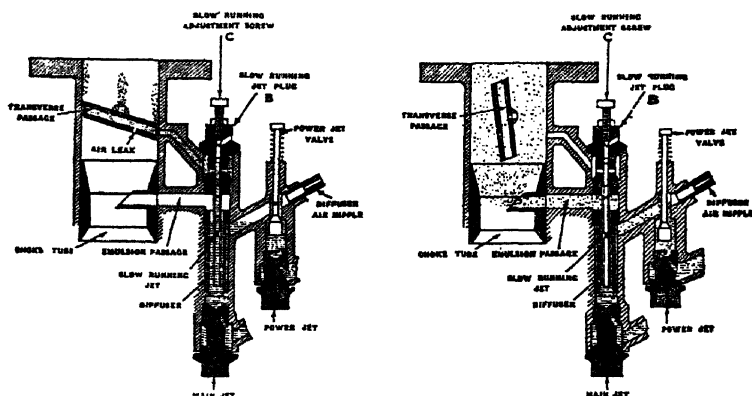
The Butterfly Throttle Model Claudel-Hobson Carburettor.
